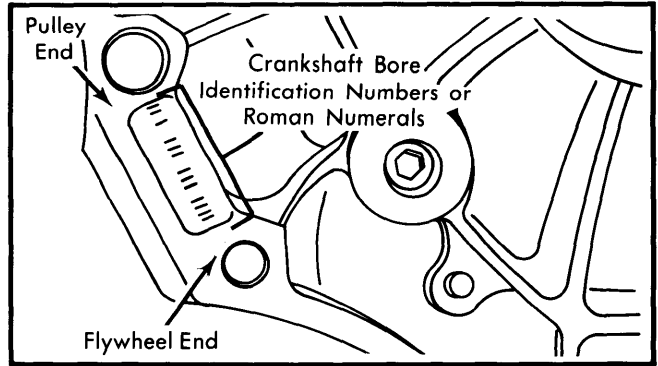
Crankshaft Identification Locations (1751 cc and 1487 cc Engines)
